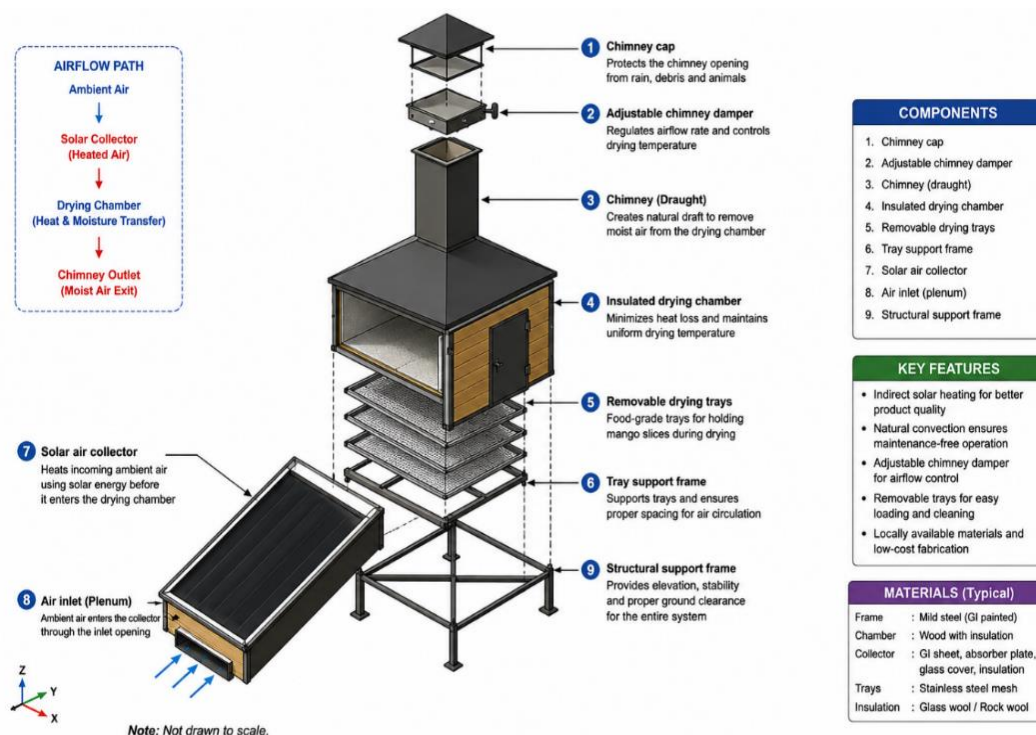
Exploded engineering view of the improved indirect solar mango dryer showing the principal structural components, including the solar air collector, insulated drying chamber, removable drying trays, support frame, chimney, and adjustable chimney cap. The exploded configuration illustrates the assembly sequence and facilitates understanding of the system architecture.
